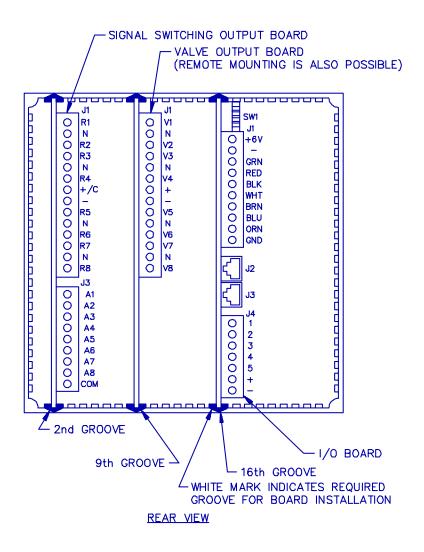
Sample Sequencer Assembly with Signal Switching Output Board (Rear View)
